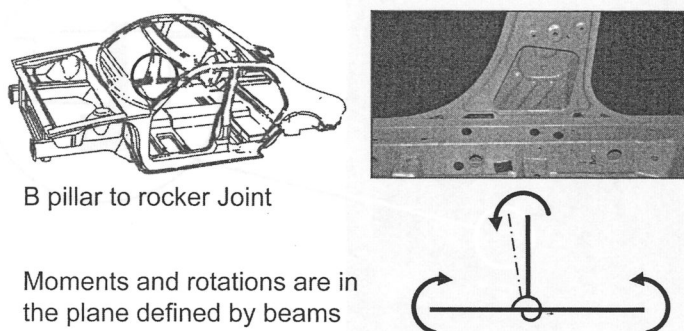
In-plane bending. (Photo courtesy of A2Mac1.com Automotive Benchmarking)
